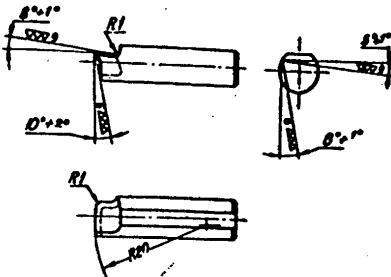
CUTTING TOOL 636170 FOR BORING CONNECTING ROD PISTON END BUSHINGS
